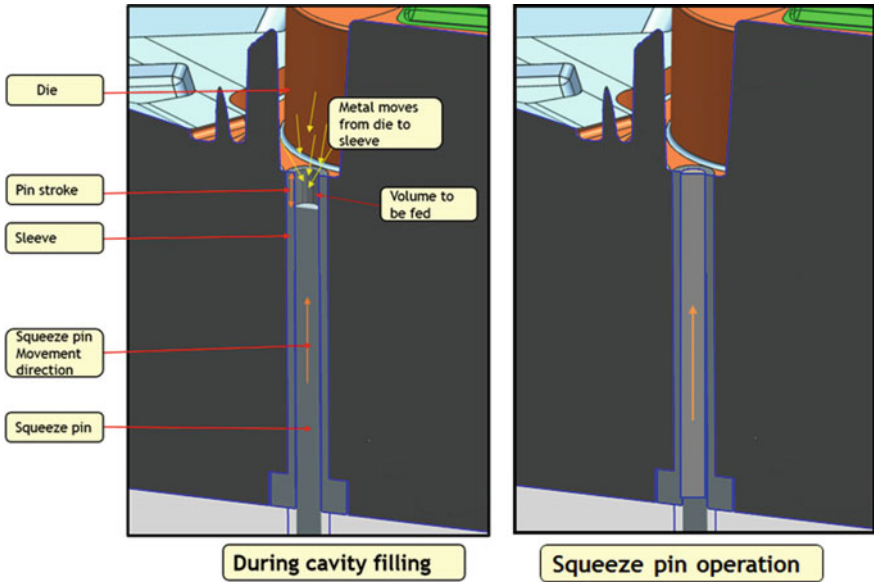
Working of local squeeze pin during cavity filling and during operation
